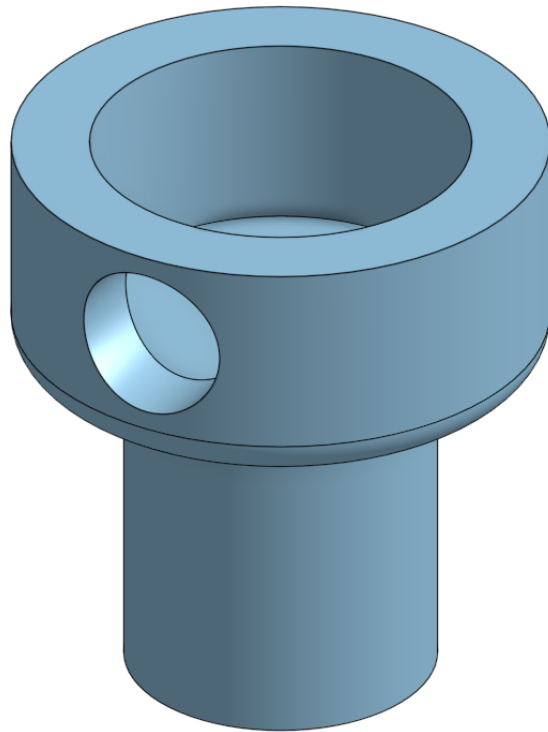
Lead screw to motor adapter CAD model: Top isometric
